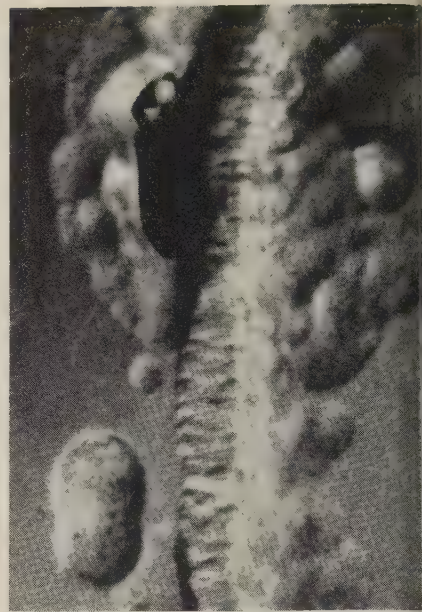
At high temperatures, the damage caused by a contaminant like sulphur can be severe. A sulphonated soap was used to test weld. Rinsing would have prevented this
